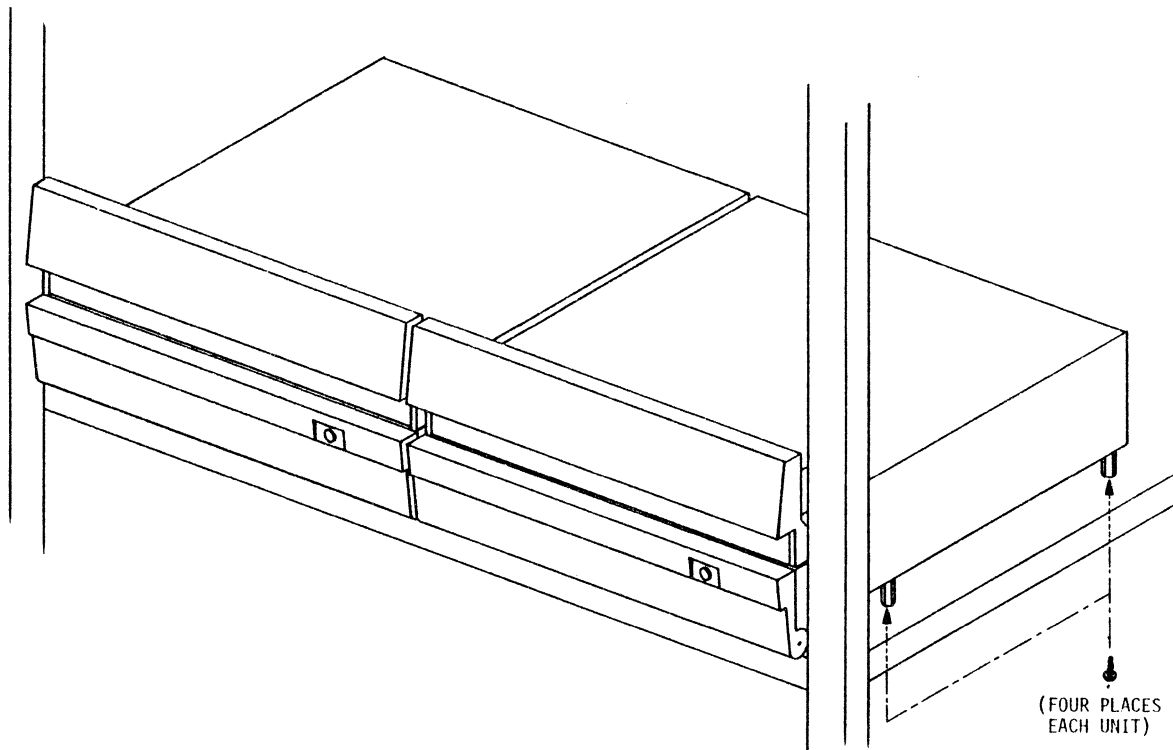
(b) : HORIZONTAL MOUNTING
